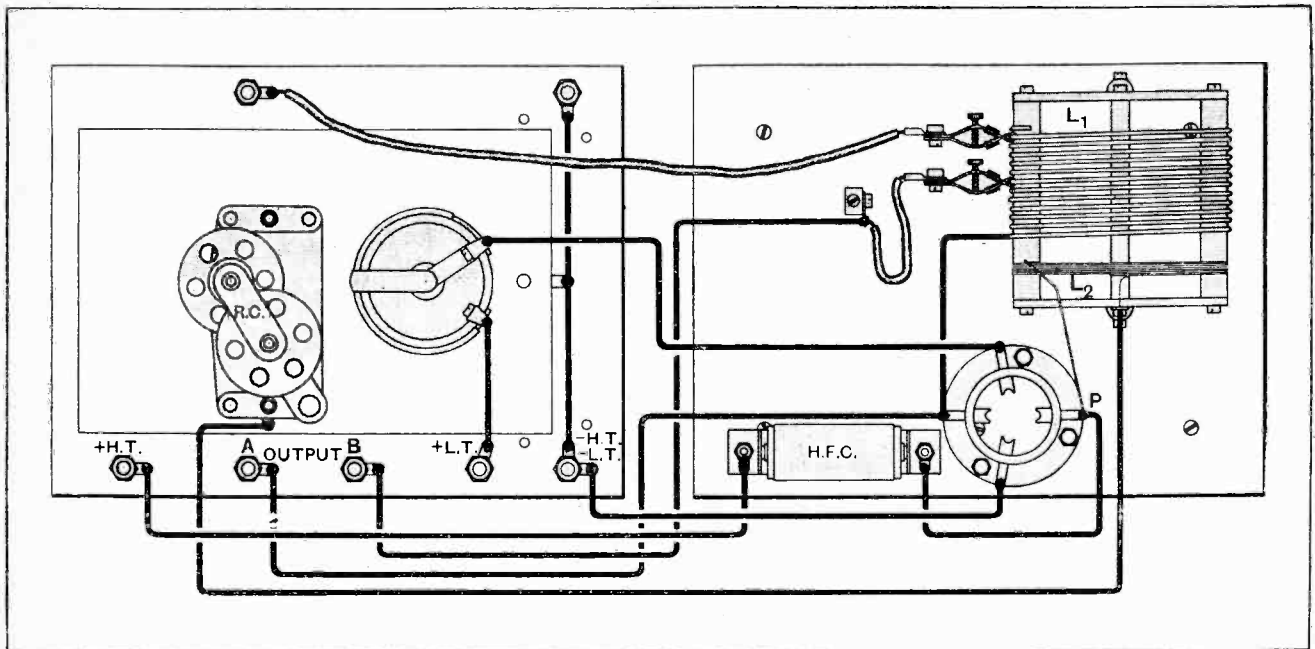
The practical wiring plan. The screen is connected to -L.T.
